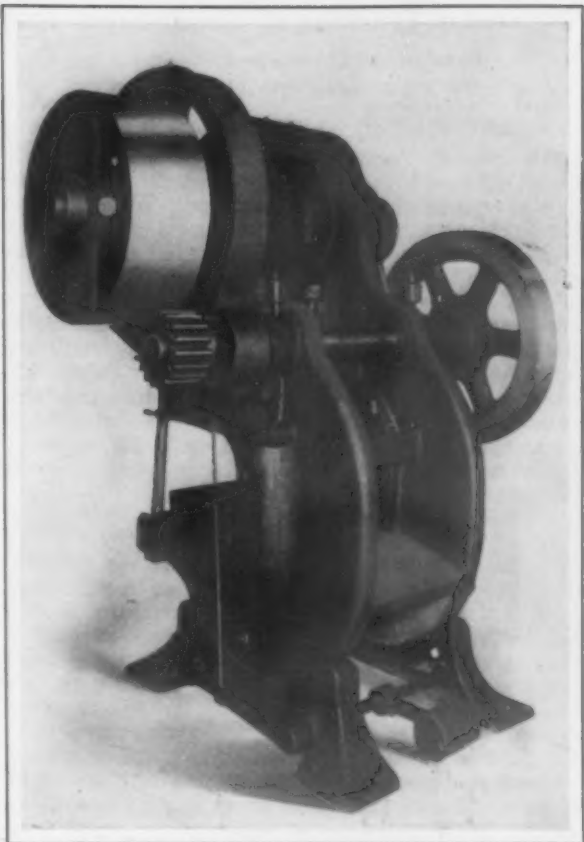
Rear View of the Press Showing the Back Gears Thrown Out of Mesh
